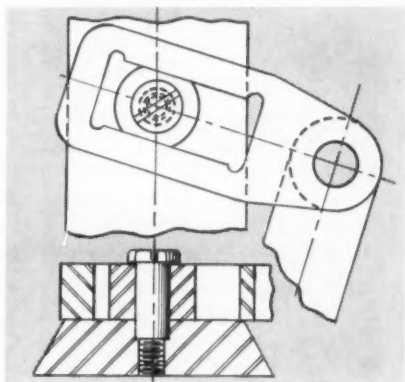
This sketch shows an arrangement for moving dovetail slide to and fro with bell crank having arm slotted to engage shoe.
